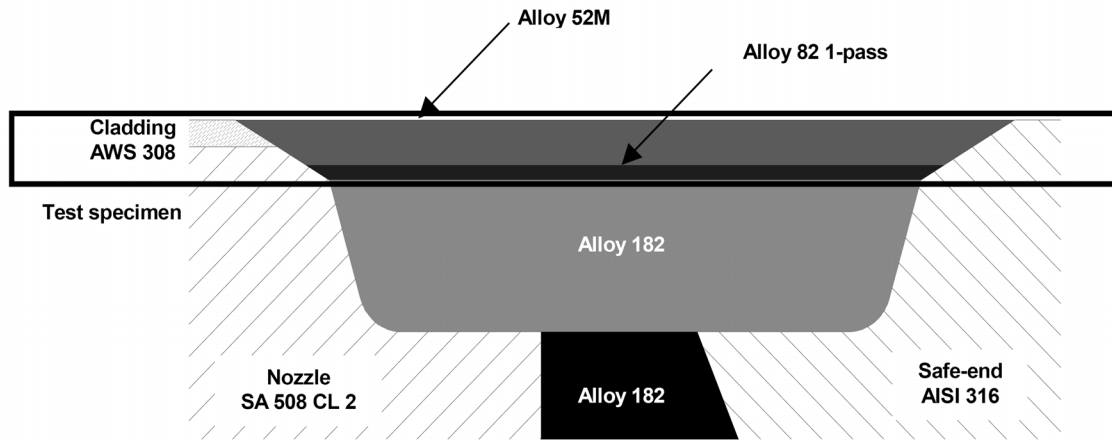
Sketch of Alloy 52M Weld Mock-up.^[54]
